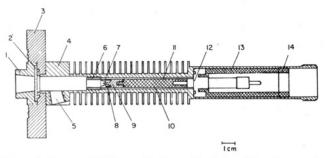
Vacuum UV short pulse lamp: 1, window tightening nut; 2, window (fluoride of lithium, calcium, or Mg); 3, "Conflat" copper gasket flange (stainless); 4, lamp stainless housing; 5, gas inlet; 6, adjustable threaded spacer; 7, tungsten copper alloy; bottom electrode; 8, macor insulating bead and electrode spacer; 9, upper spark electrode—tungsten copper; 10, high voltage side of coaxial capacitor—stainless; 11, alumina dielectric of capacitor; 12, gas seal with high voltage feedthrough; 13, Teflon insulator (atmosphere side); 14, tightening nut of assembled lamp.
